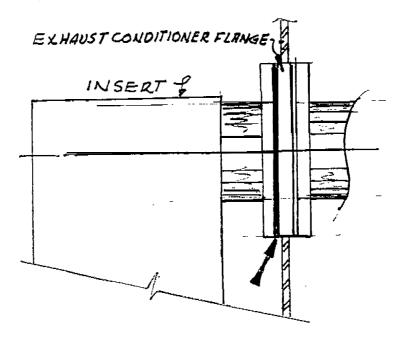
Showing Gasket Between Exhaust Conditioner Flange and Scrubber Insert Flange.
